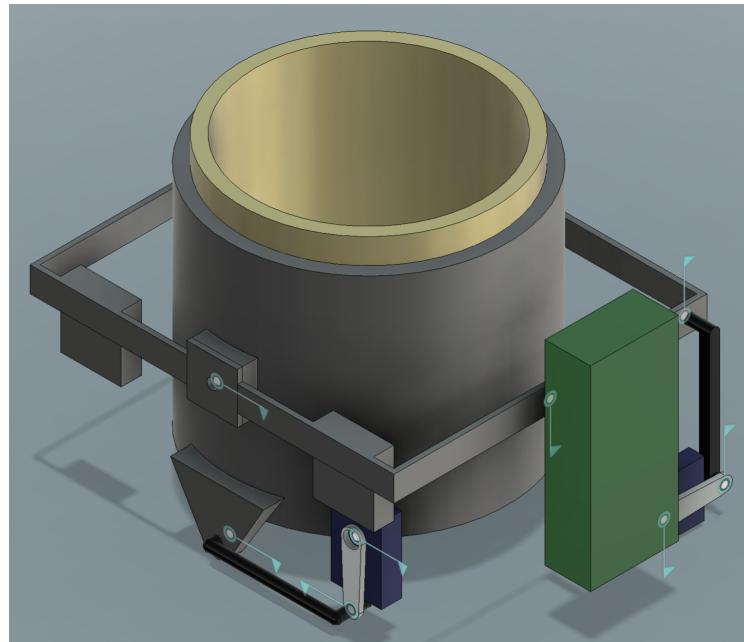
Isometric view of the thrust vectoring mechanism (Version 1)
